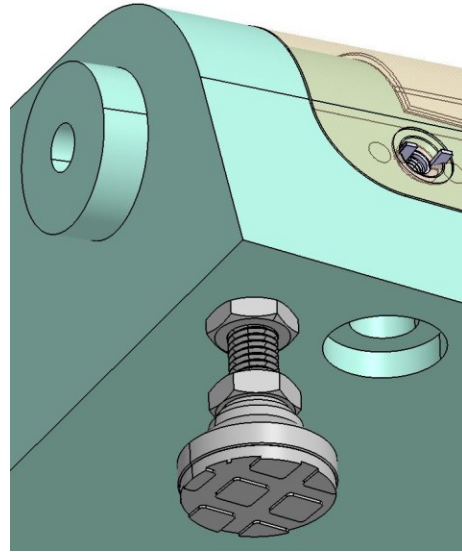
Detail view of datum, foot, TDM counterbore hole, and floating Keensert used
